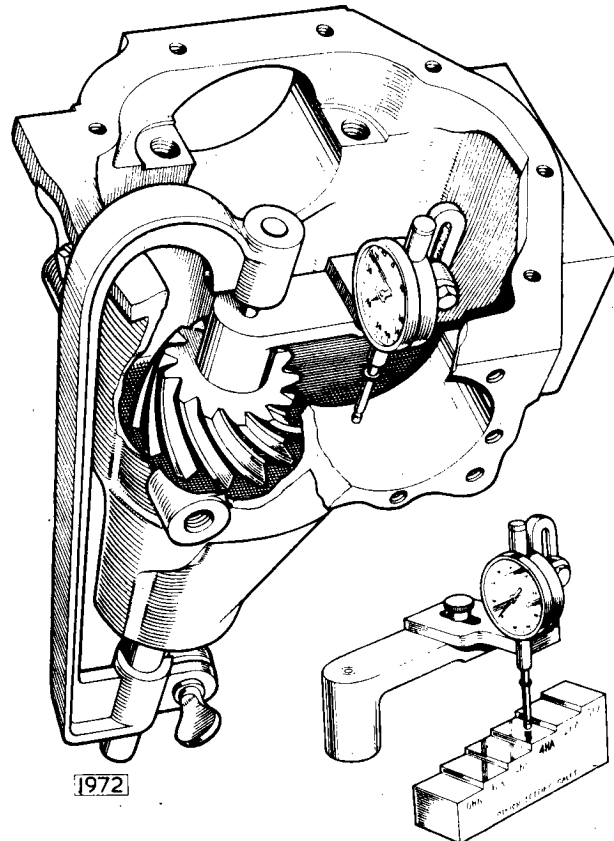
Checking the pinion cone setting using Churchill Tool SL 3 P (with the later type of magnetic dial gauge post the clamp fixture is not required)
